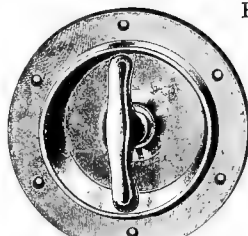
Berth Lock Handle. Adams & Westlake Company.
